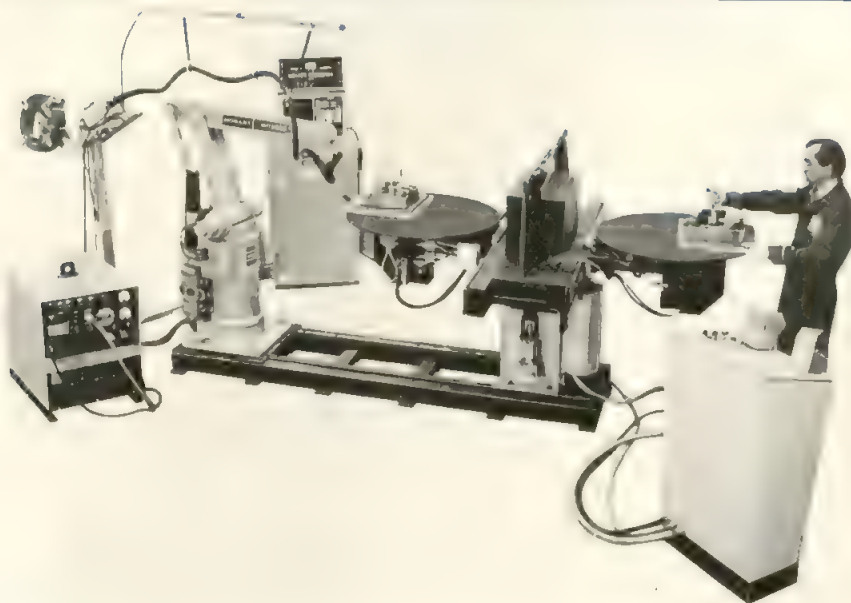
Typical installation of jointed-arm welding Robot.
